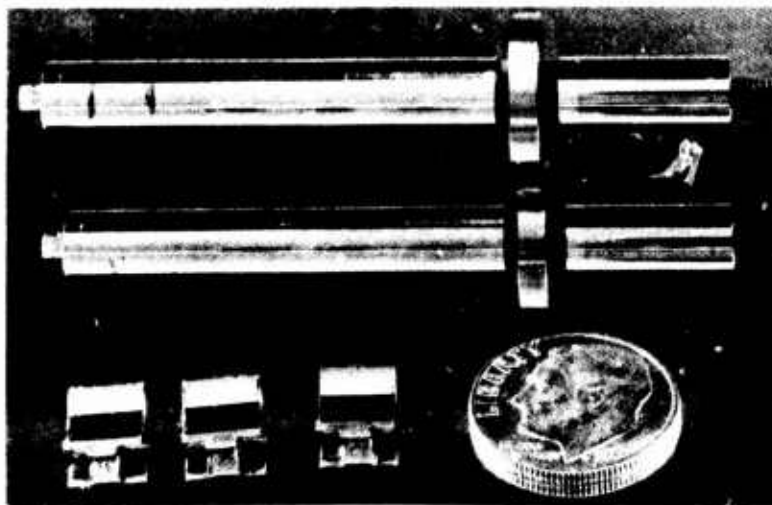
Turboalternator Shaft and First-Stage Journal Bearings from Build 6 (Photographed Above Mirror to Show Discoloration of First-Stage Journal Bearing Surface)
